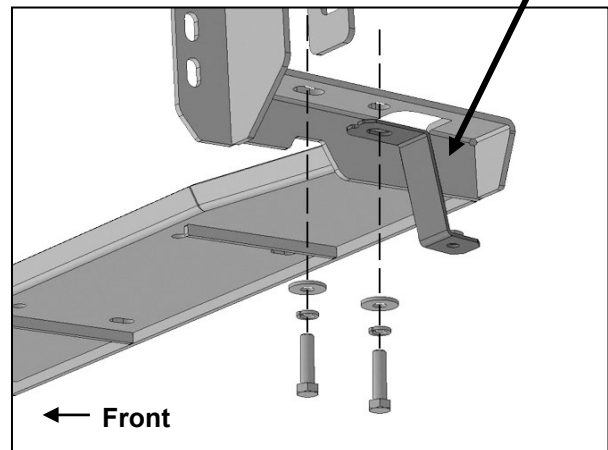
Slide driver/left side of Tray Bracket Assembly over mounting studs on frame
